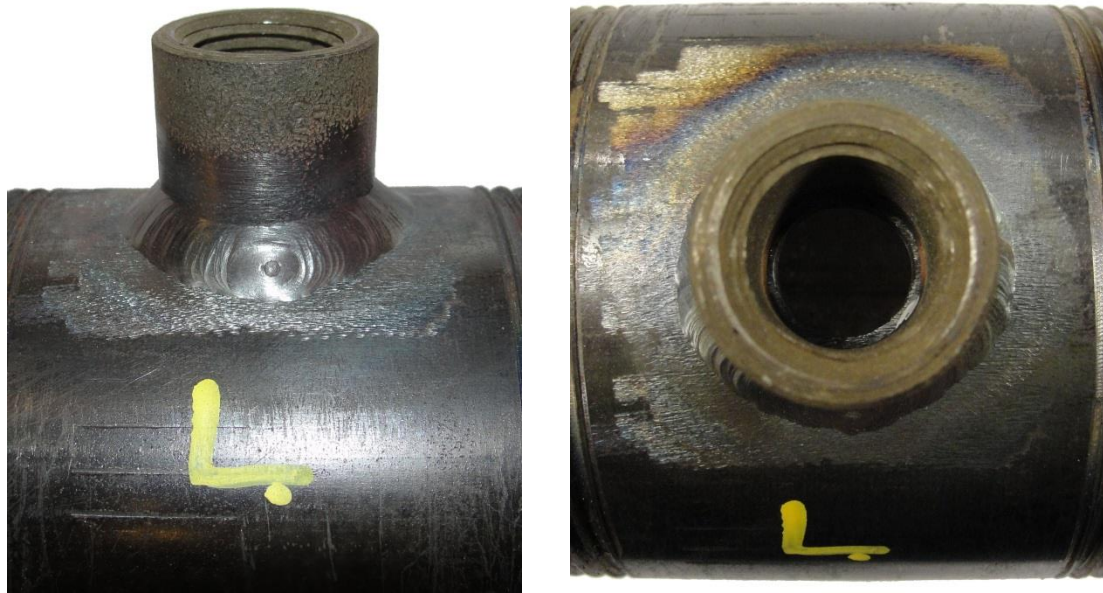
3/4" NPT Half Coupling Welded to Pipe with 13/16" Hole Drilled Through Center
